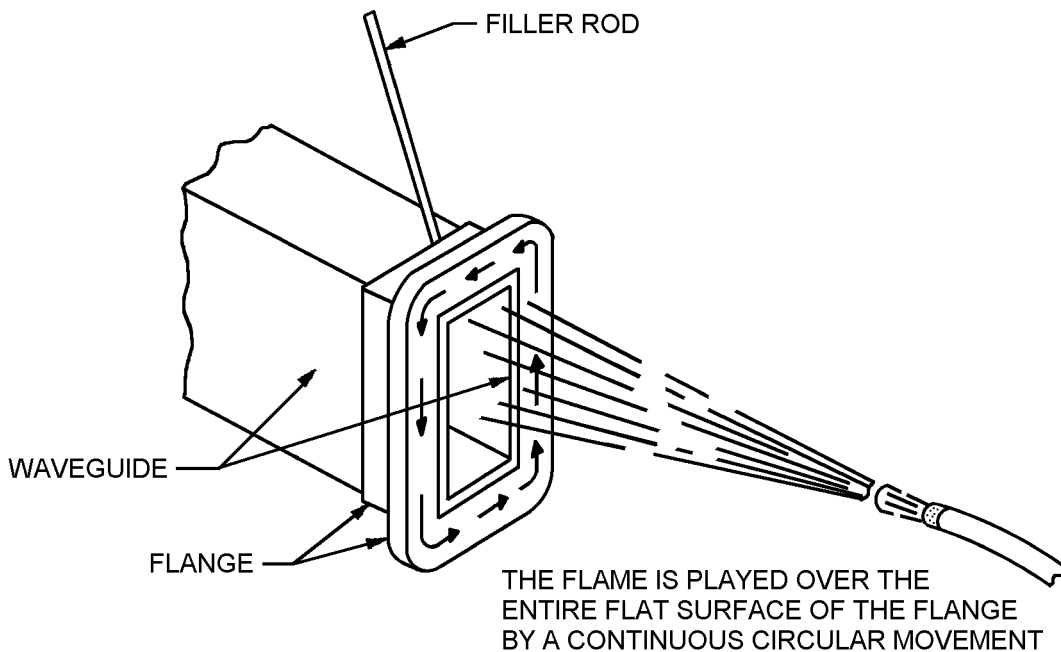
Silver soldering waveguide and flange-sleeve design.
